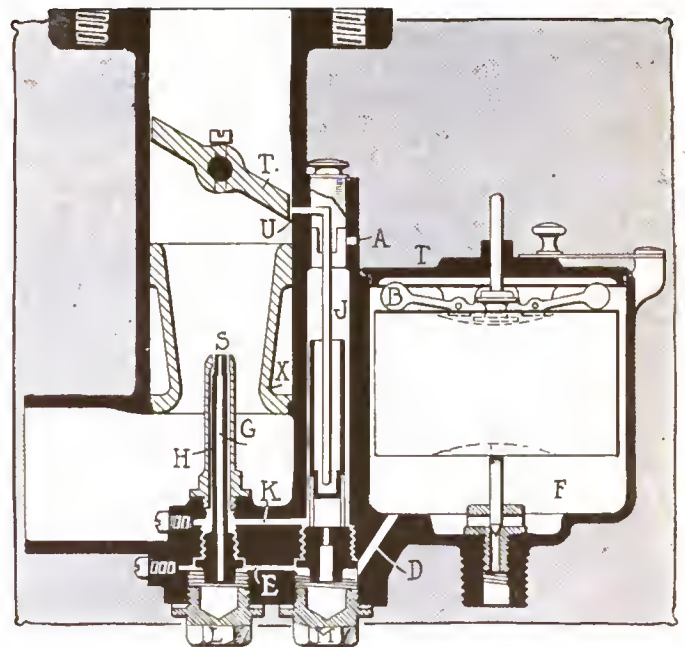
Zenith carburetor employs auxiliary jet at butterfly valve edge
